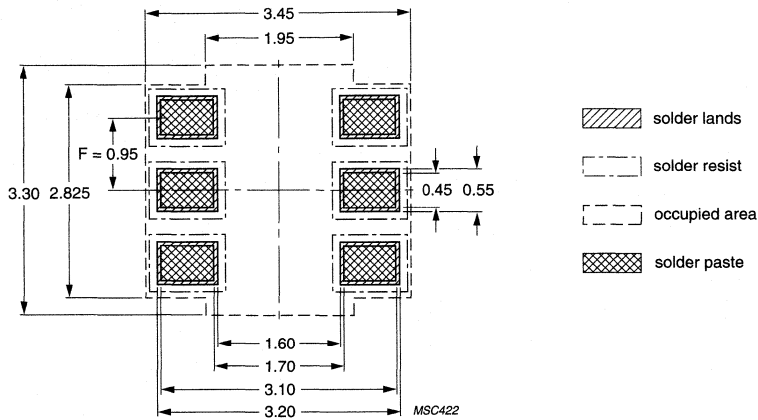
Reflow soldering footprint for SOT457 (SC-74).
